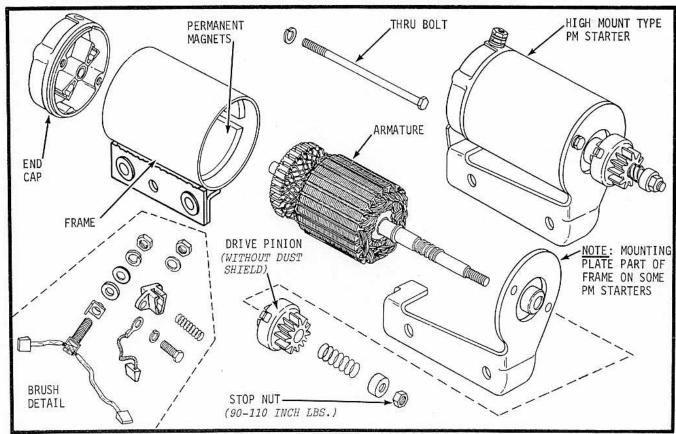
PERMANENT MAGNET TYPE STARTING MOTOR--EXPLODED VIEW
